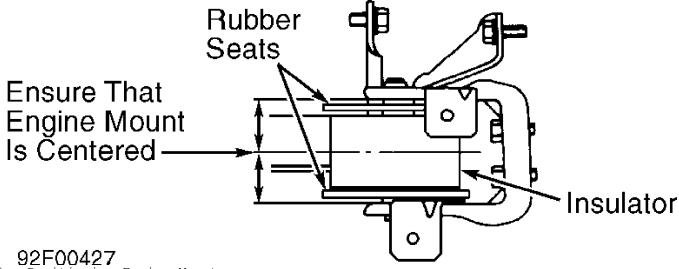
Positioning Engine Mounts Courtesy of Nissan Motor Co., U.S.A.
